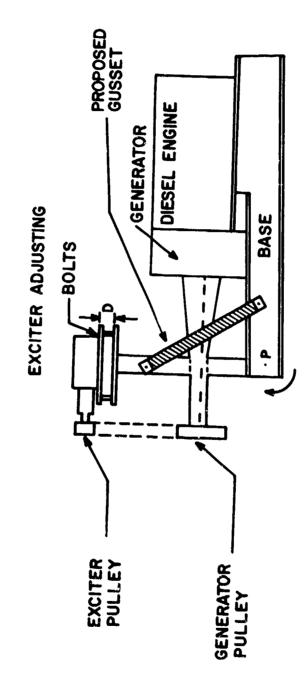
Schematic arrangement of generator and exciter base and mountings.
